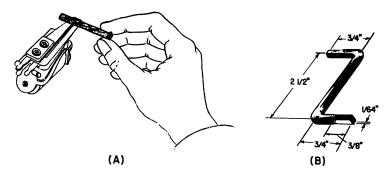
(A) Relay burnishing tool; (B) relay point bender.
